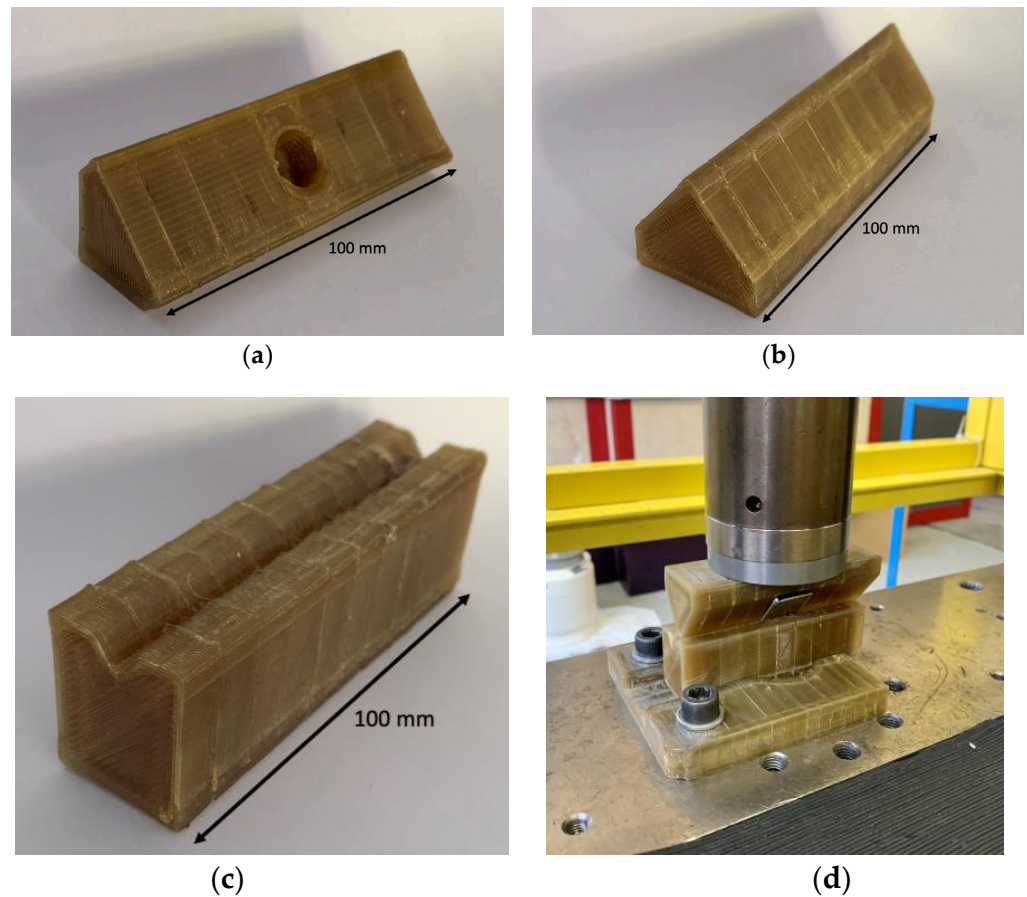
3D printed punch after removal of burrs with pliers; in (a) the side of the punch which is connected to the machine ram is shown; in (b) the active side of the punch is shown; 3D printed die (c), complete 3D printed tooling set (d) after post-processing with sandpaper and Dremel, mounted on the MTS machine (the bent sheet metal is also shown).
